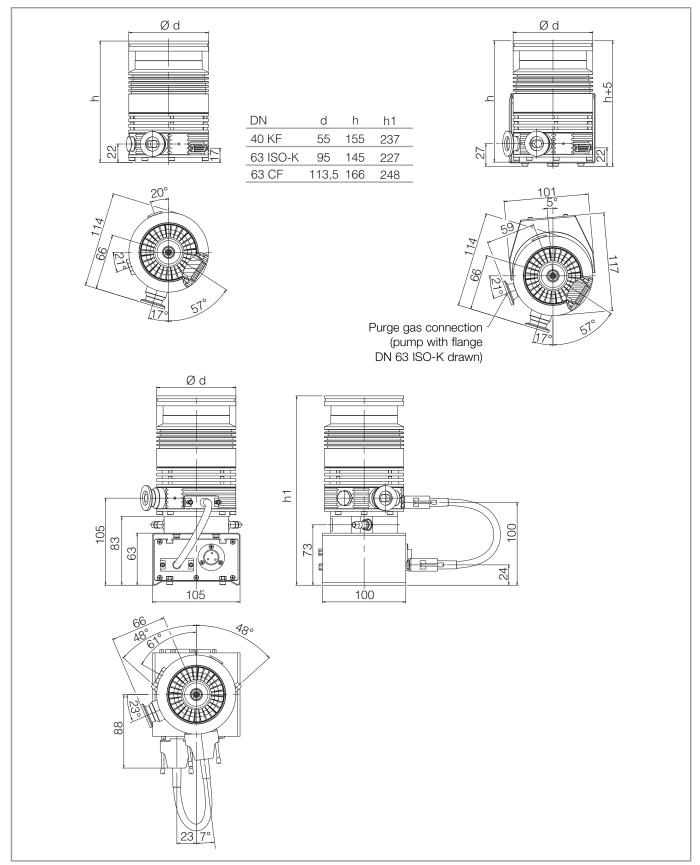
Dimensional drawings for SL 80 pumps (combination examples); dimensions in mm
